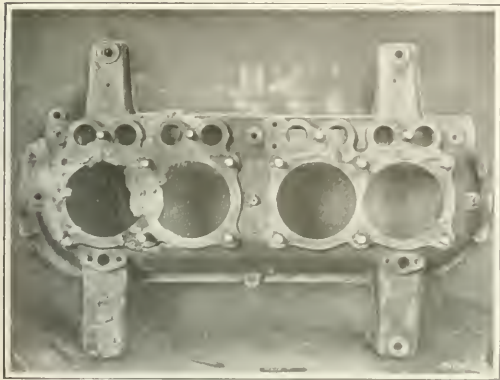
Crank-case damaged by the Use of Flux and Improper Welding
